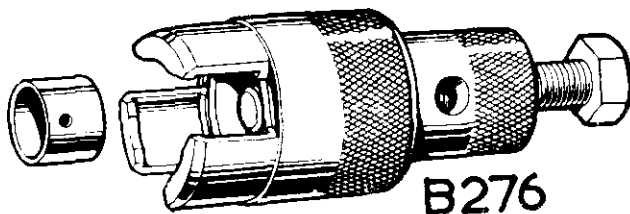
Extractor tool 61-6019 showing protection cap which fits over crankshaft
